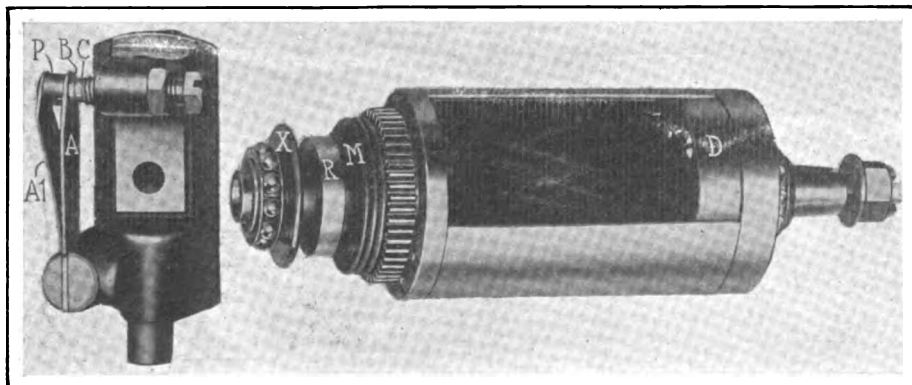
Left—Detail of breaker mechanism. Right—Armature showing slip ring R and insulating rings M and X
